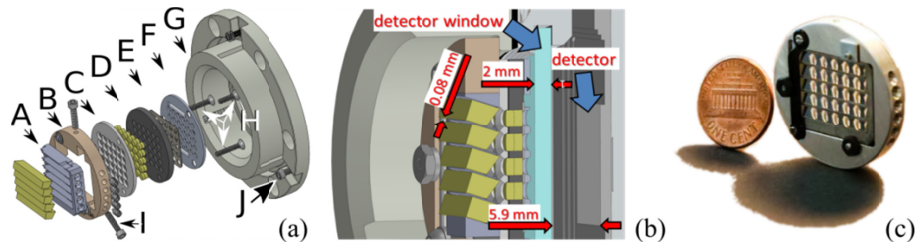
Exploded view model of the lenslet assembly (a). Cross-section through the lenslet assembly with critical dimensions and elements indicated (b). Photograph of complete assembly with one-cent coin for size comparison (c).
